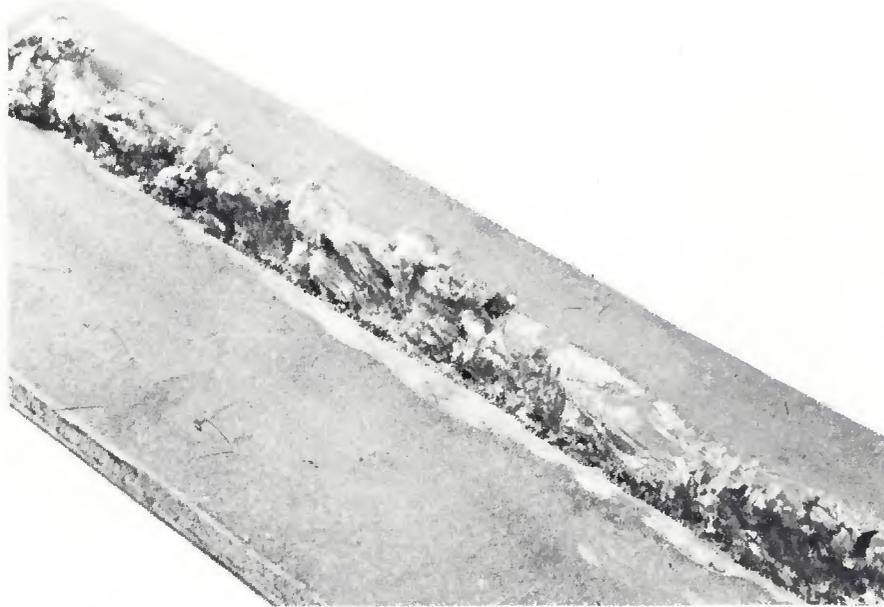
Surface of SAW weld in mild steel with pure NaF flux (electrode negative)
